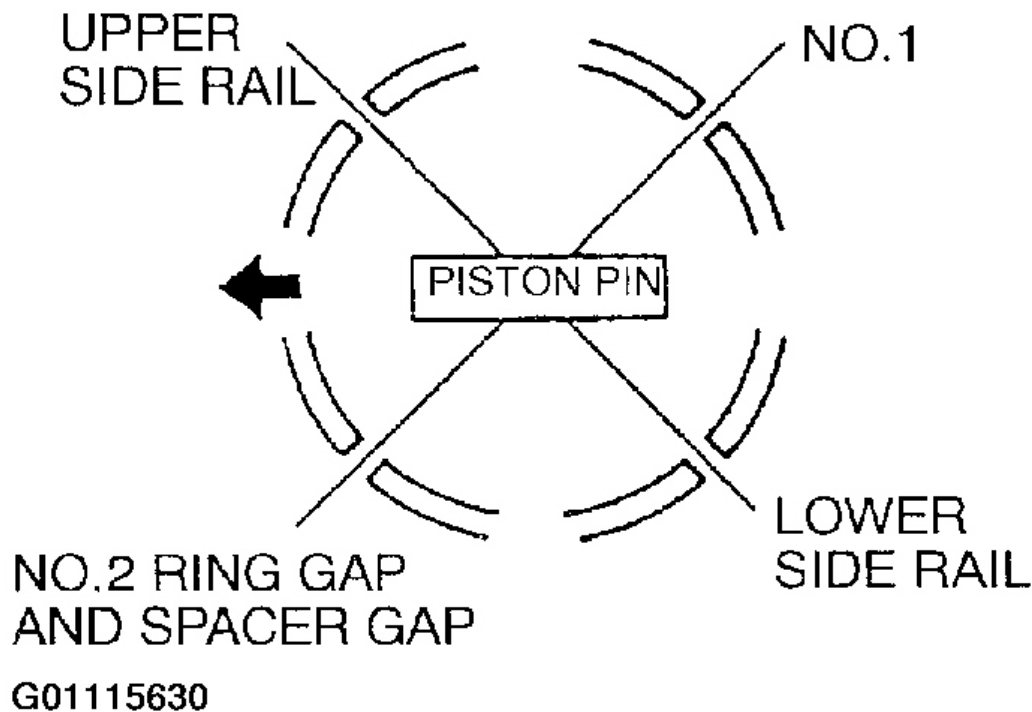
Arranging Piston Ring & Oil Ring Gaps
